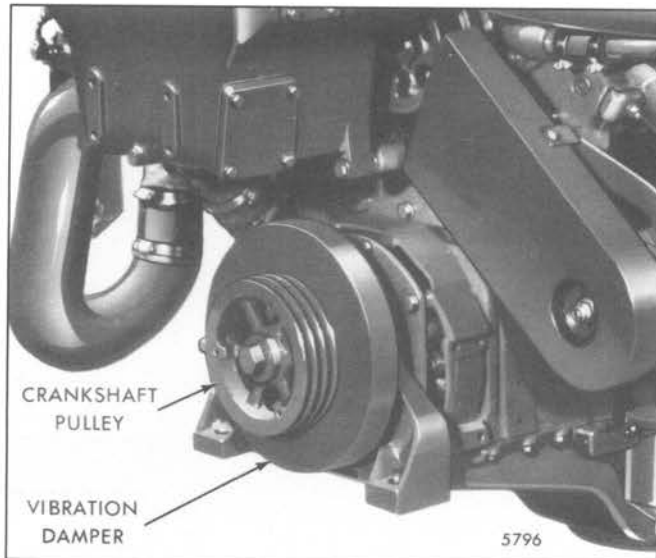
Crankshaft Pulley Mounting – 8V Engine
